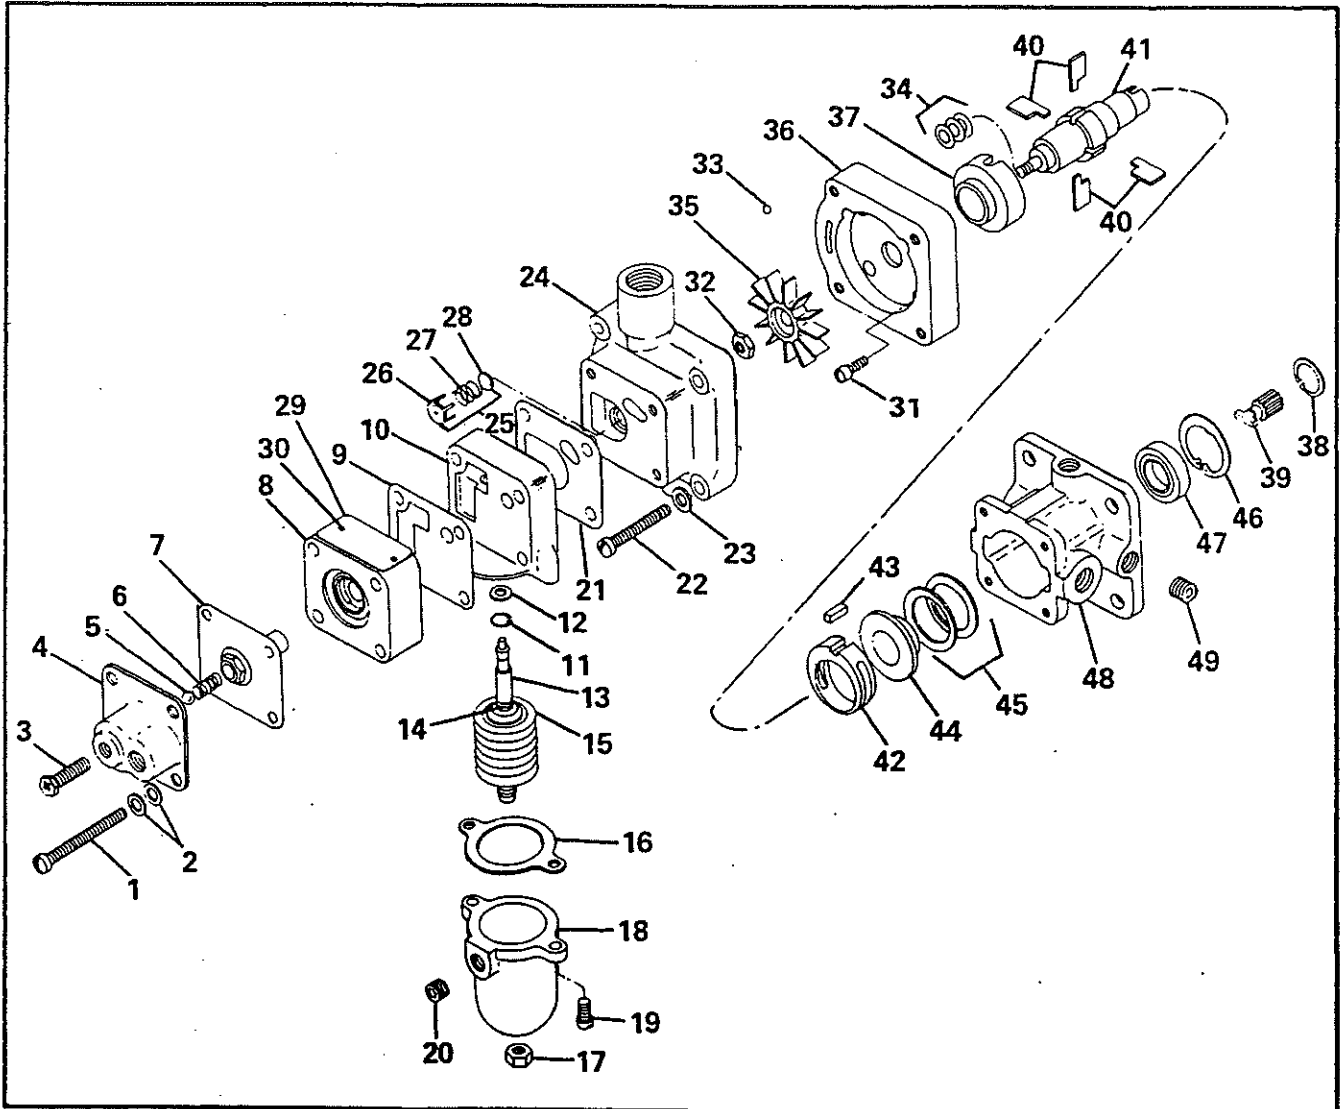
FUEL PUMP ASSEMBLY.
